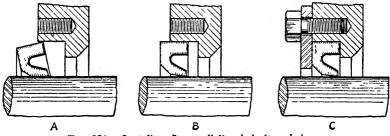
Main-bearing shaftseal ring (Courtesy of Garlock Packing Co)
